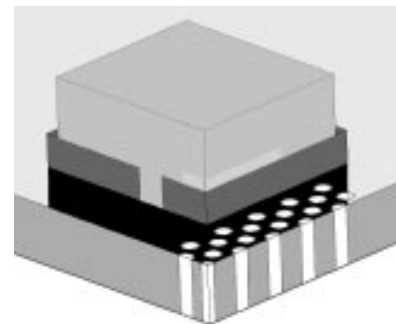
PLD 1.5 Mounted on PCB with Thermal Vias, One-quarter Exploded Solid Model View
